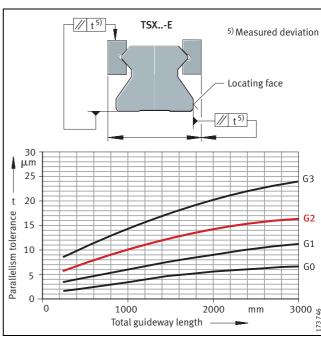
· Accuracy classes and parallelism tolerances of guideways
